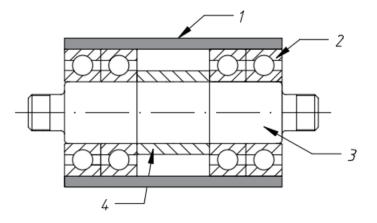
The roller constructure 1-roller tires, 2-ball bearings, 3-roller shaft, 4- internal cylinder.
